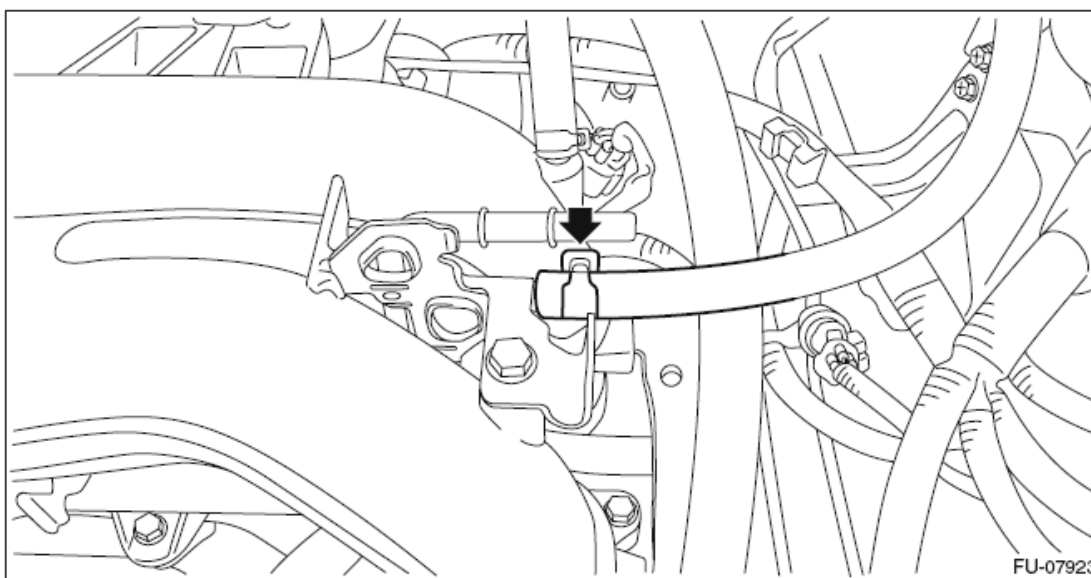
Locating Fuel Pipe Assembly Evaporation Hose
